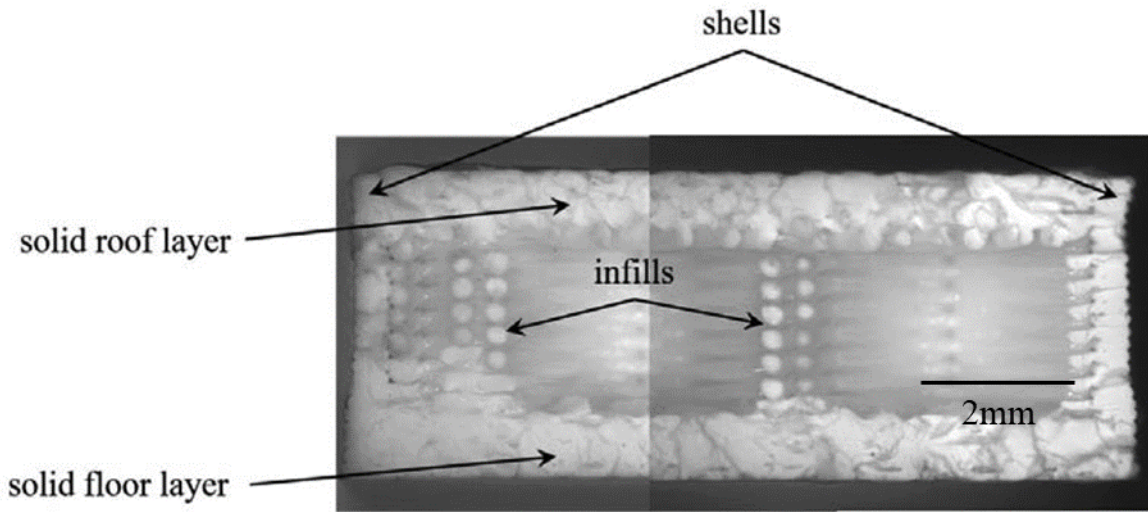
Cross-section of a printed specimen with a solid shell and 45°/-45° infill pattern, reproduced from [23], copyright 2002, © Emerald Publishing Limited all rights reserved.
